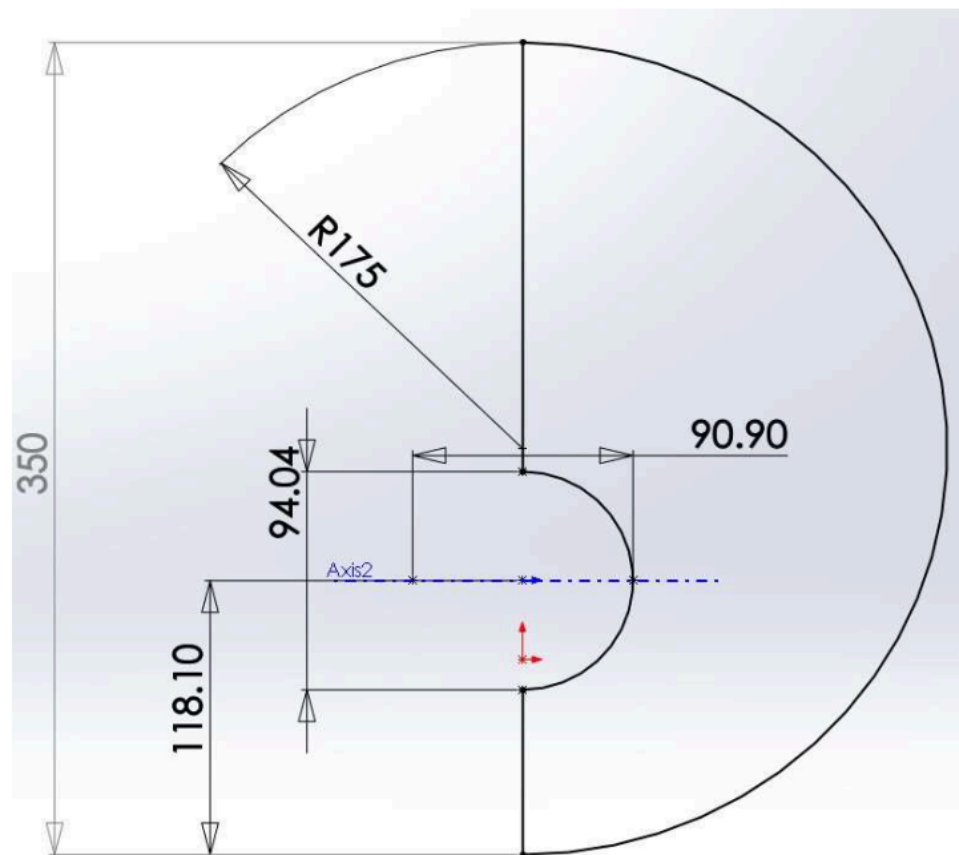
Dimensions of an elliptical cut to match a 15° angle on the pipe with one millimetre clearance around the pipe.
